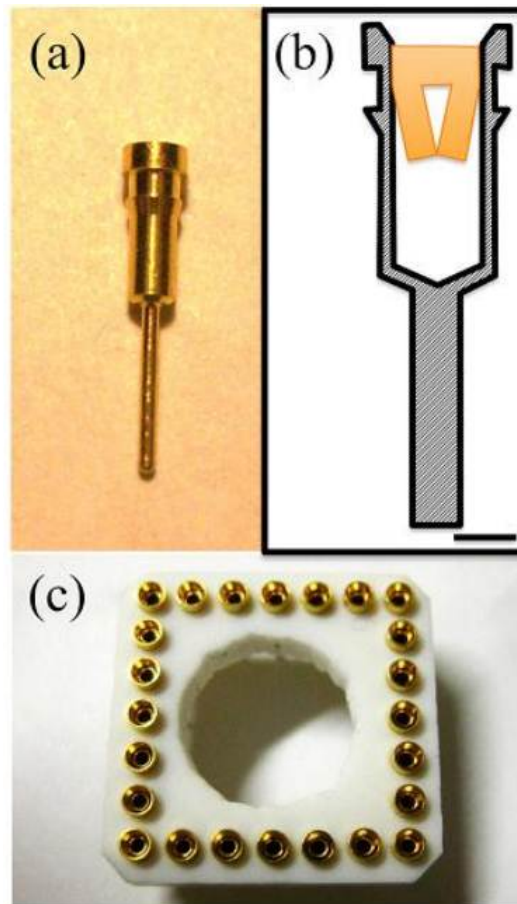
(a) Photograph of a Samtec SC series socket. (b) Schematic cross section of a Samtec SC series socket. The orange region denotes the gold-plated BeCu spring contact. The shaded region represents the gold-plated brass casing for the spring contact. The scale bar is 1/32 in. (c) A socket array for a PGA fabricated from the commercial sockets. The insulating support is made from MACOR ceramic and sockets are glued using nonconductive epoxy.
